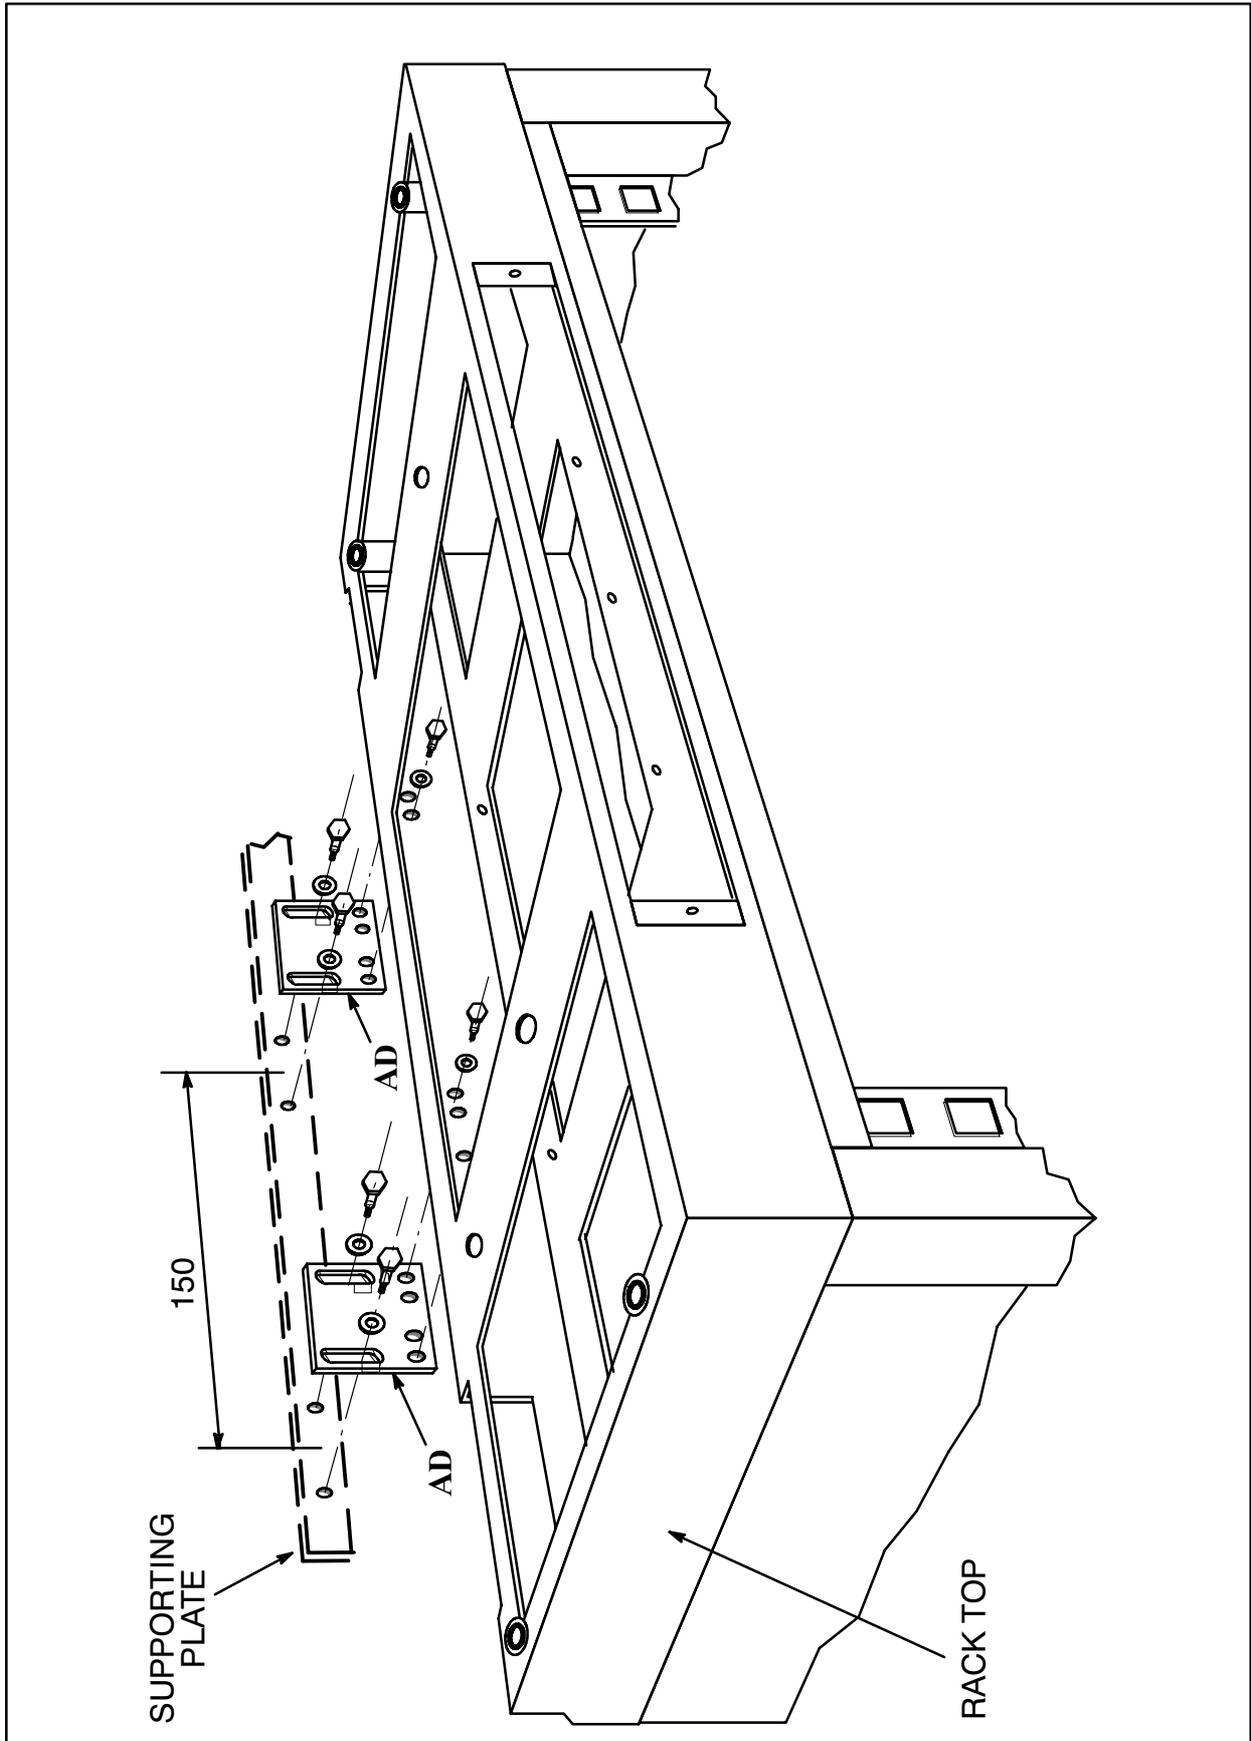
Rack wall mounting – supporting plate and rack top element
